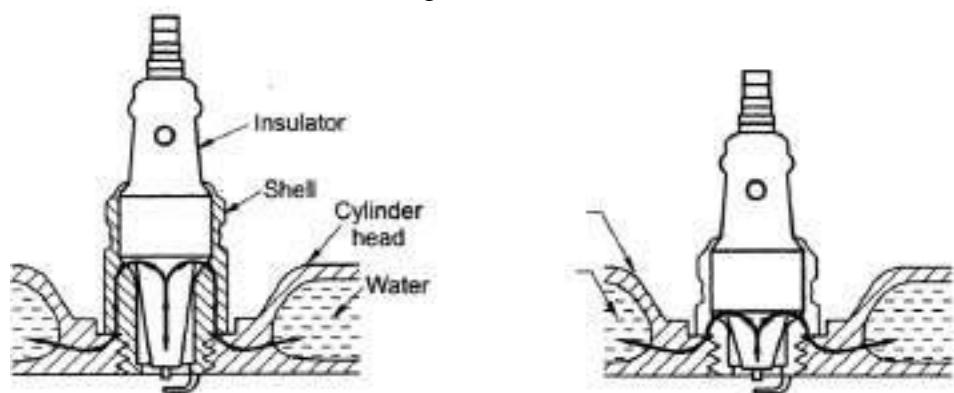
Heat Transfer Path of Hot and Cold Spark Plug
